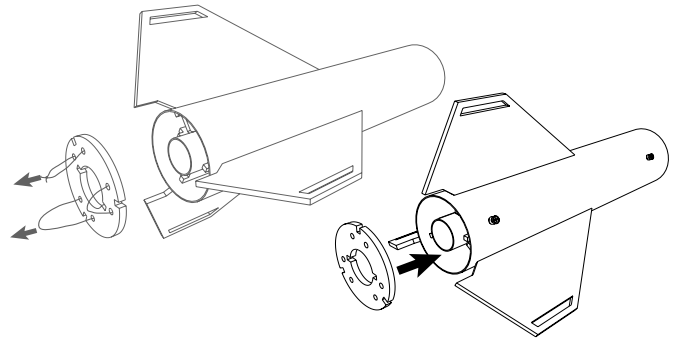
A removable aft centering ring allows you to come back and put glue fillets inside the tube.
